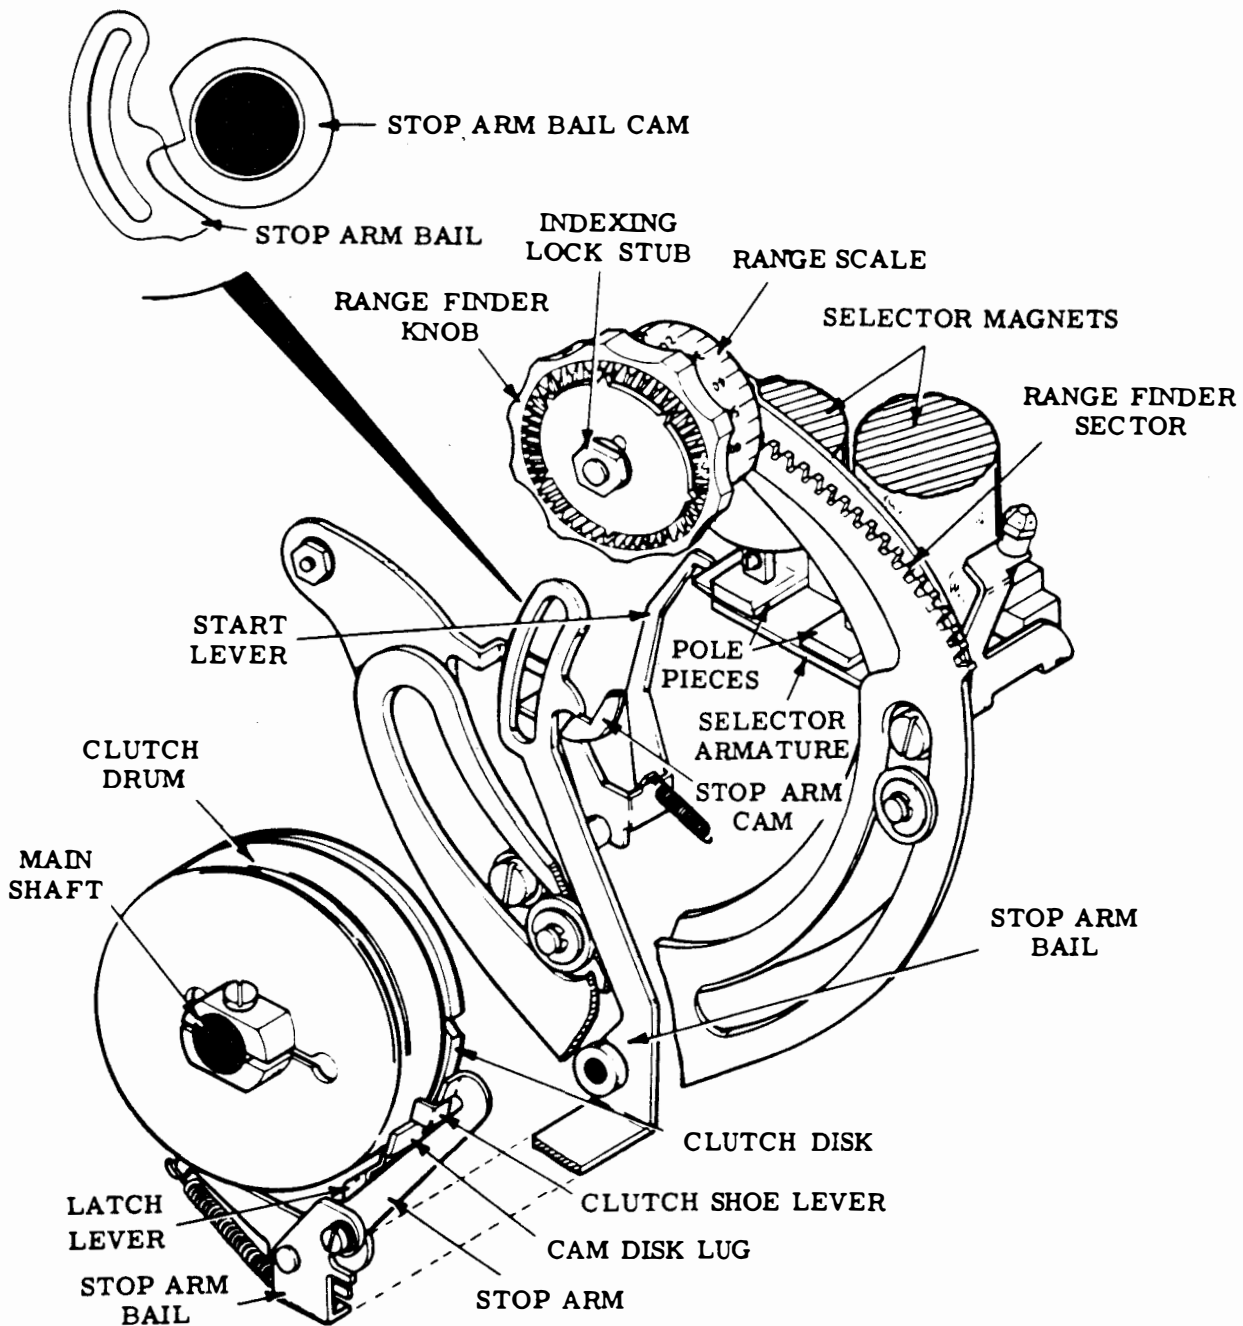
Range Finder and Selecting Cam-Clutch Assembly
